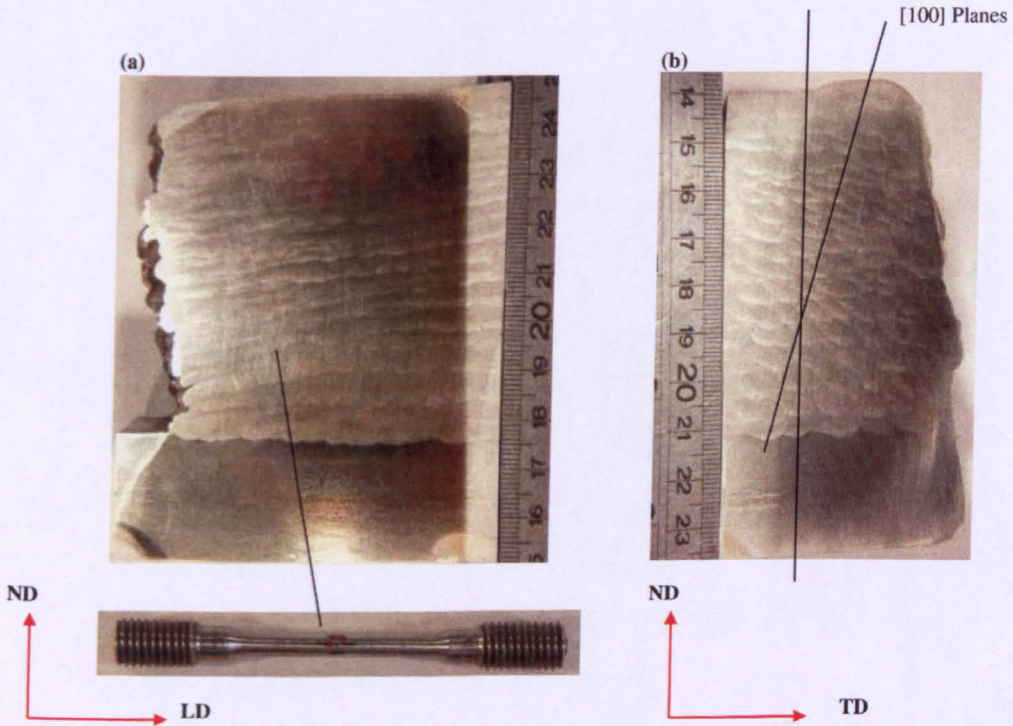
(a) The orientation of specimen in the weld-pad (b) location of the compliant planes in the weld-pad.
